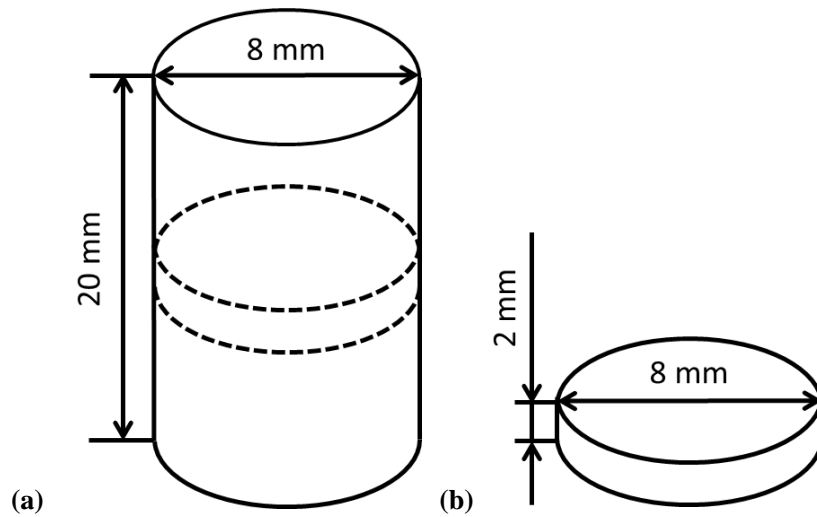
Cylindrical specimen and the sample for TDS measurement: (a) cylindrical specimen;
